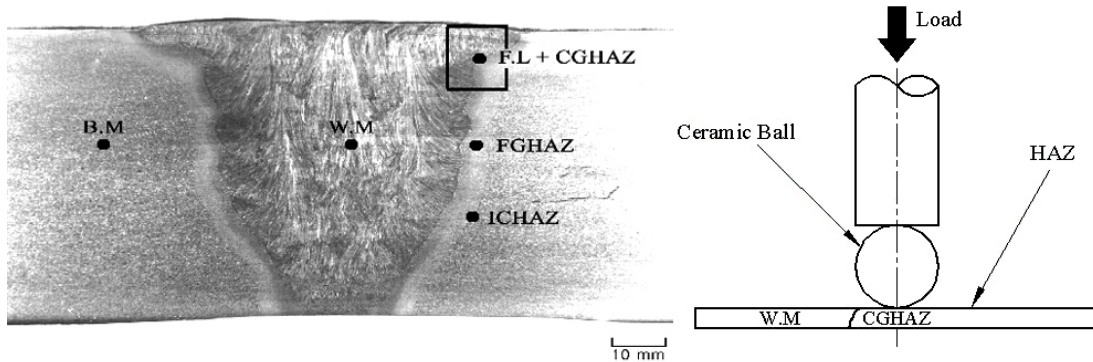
Schematic illustration for X20CrMoV121 steel weldment, machining position and orientation of SP specimen, and loading method for CGHAZ specimen
